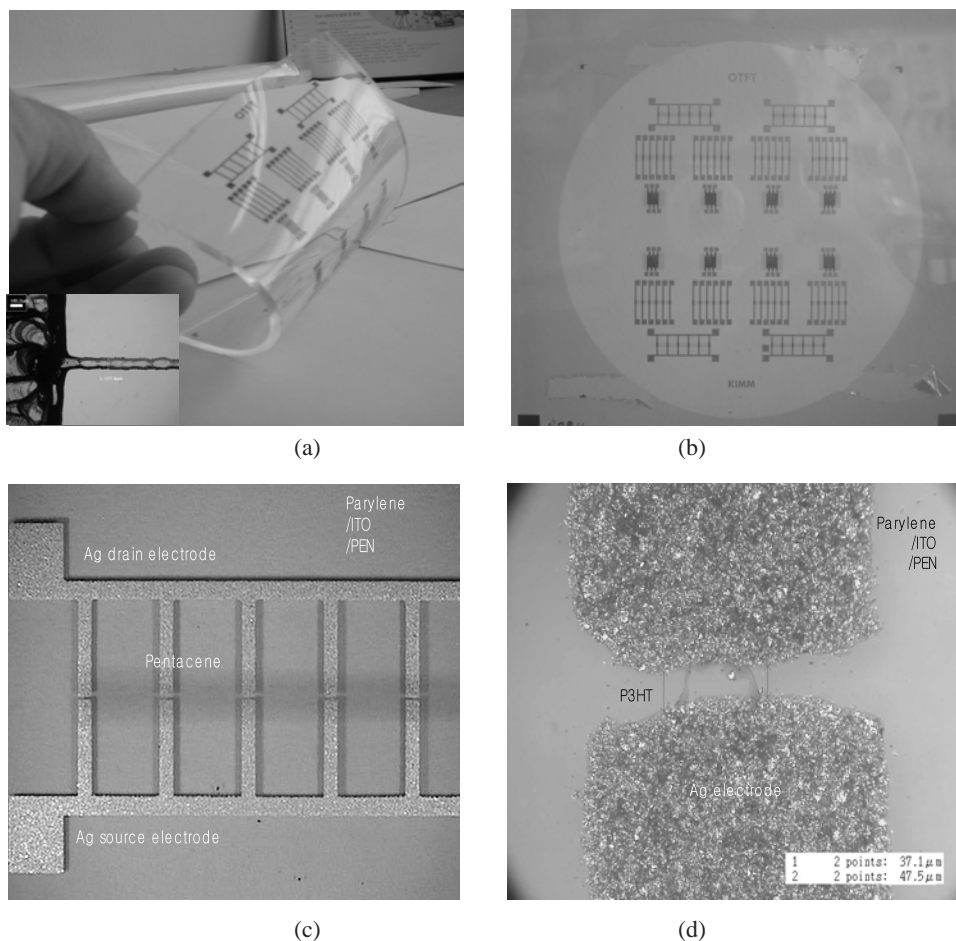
Images of fabrication of printed OTFTs: (a) h-PDMS stamp, (b) printed OTFT devices of 125×125 mm size, (c) pentacene deposited onto OTFT, preformed parylene-C dielectric layer, ITO gate, and Ag source and drain electrodes, and (d) ink-jet printing of solution of P3HT organic semiconductor onto Ag source and drain electrodes.
